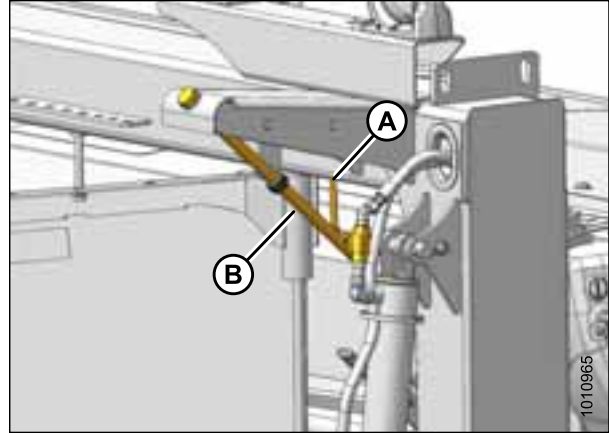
Right Side Float Adjuster – Left Side Similar
